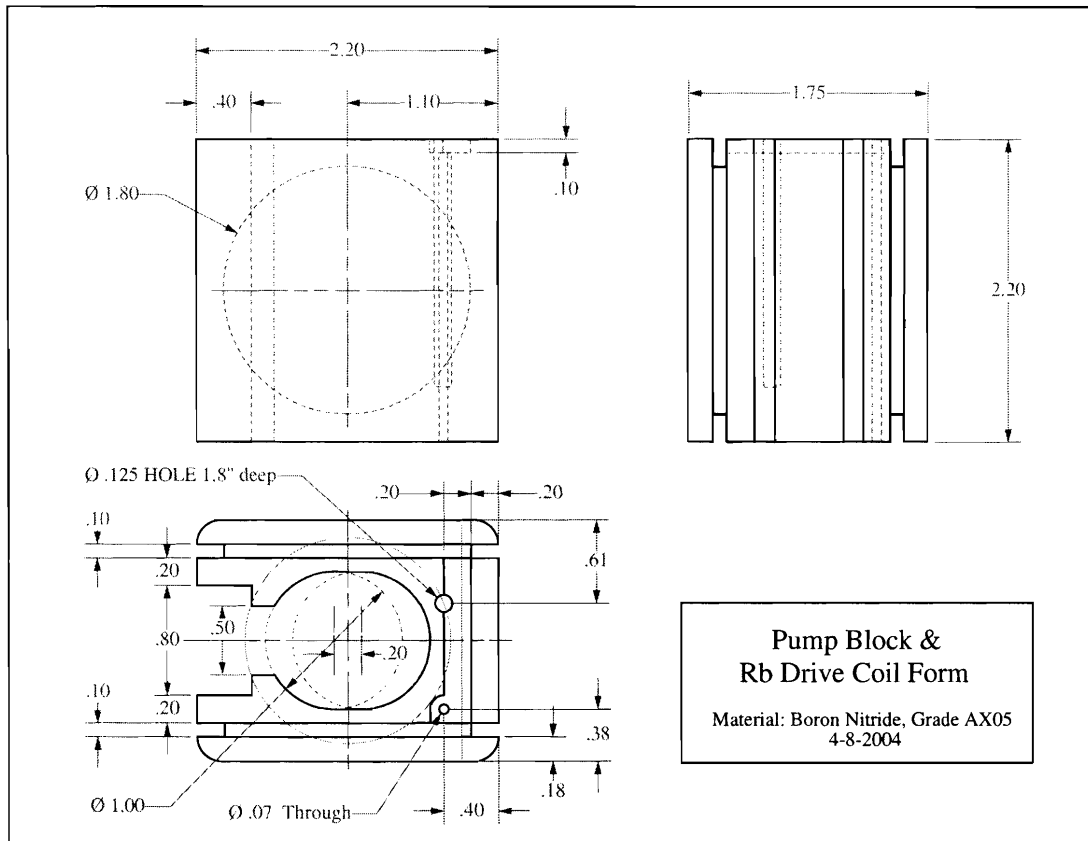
Machine drawing of the pump block. All dimensions are in inches.
